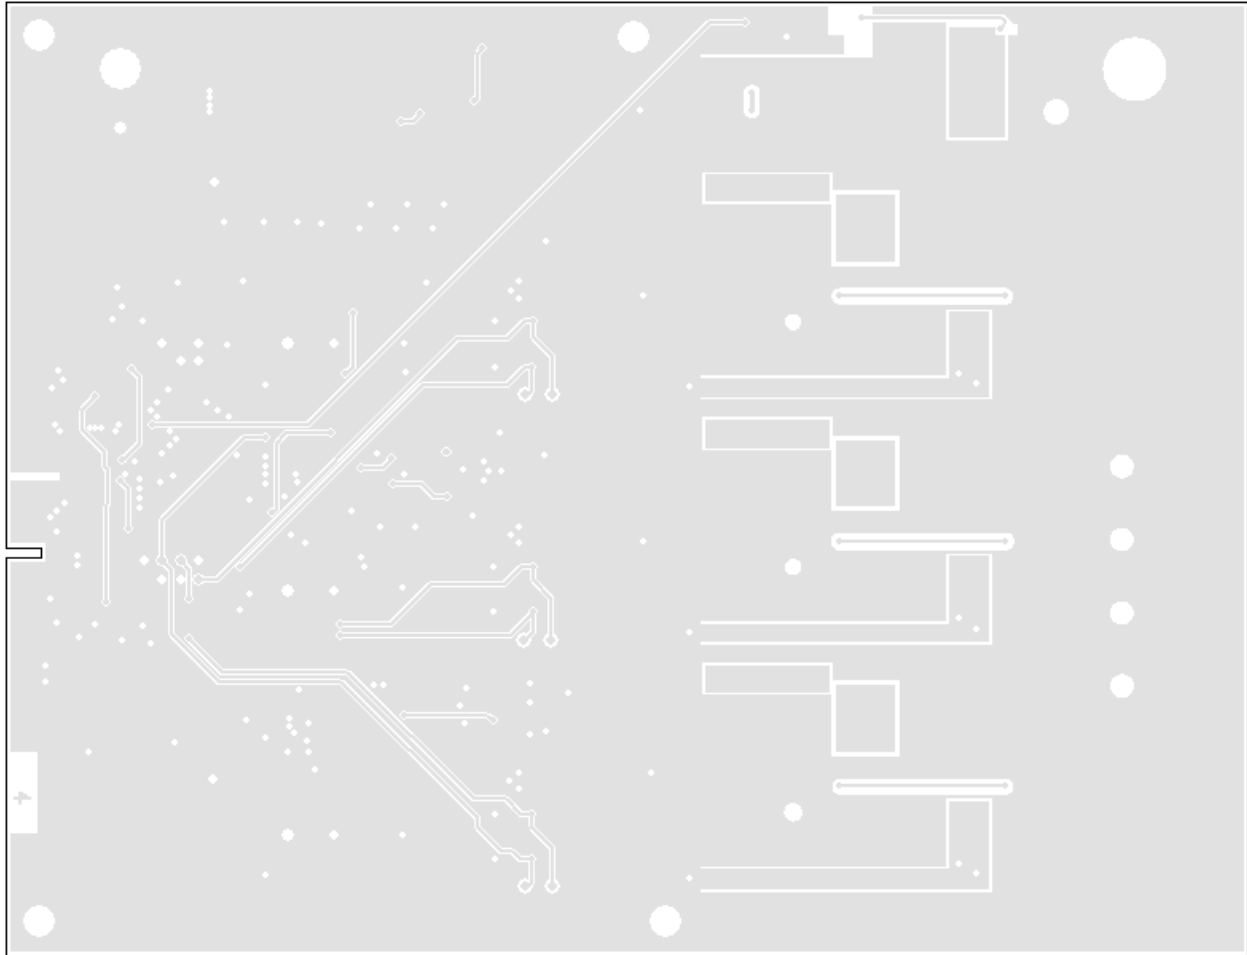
EPC7C006/FBS-GAM02 3-Phase Motor Driver Eval. Board Inner Layer 3 Copper Etch (1 oz).
